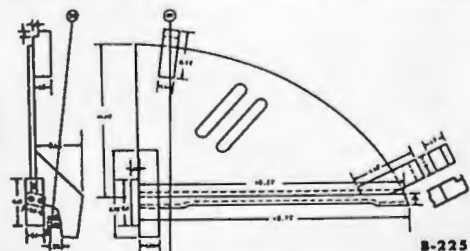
Scale Drawing of Gauge Used to Align Top.
